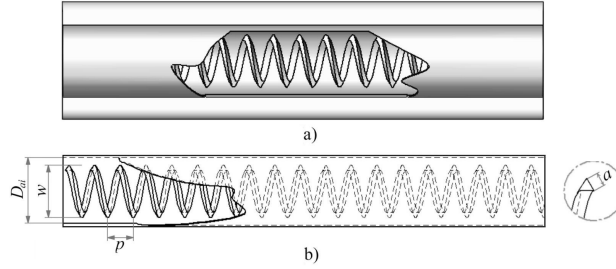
a) Wire coil insert in the receiver tube and b) Details of insert wire [32].
